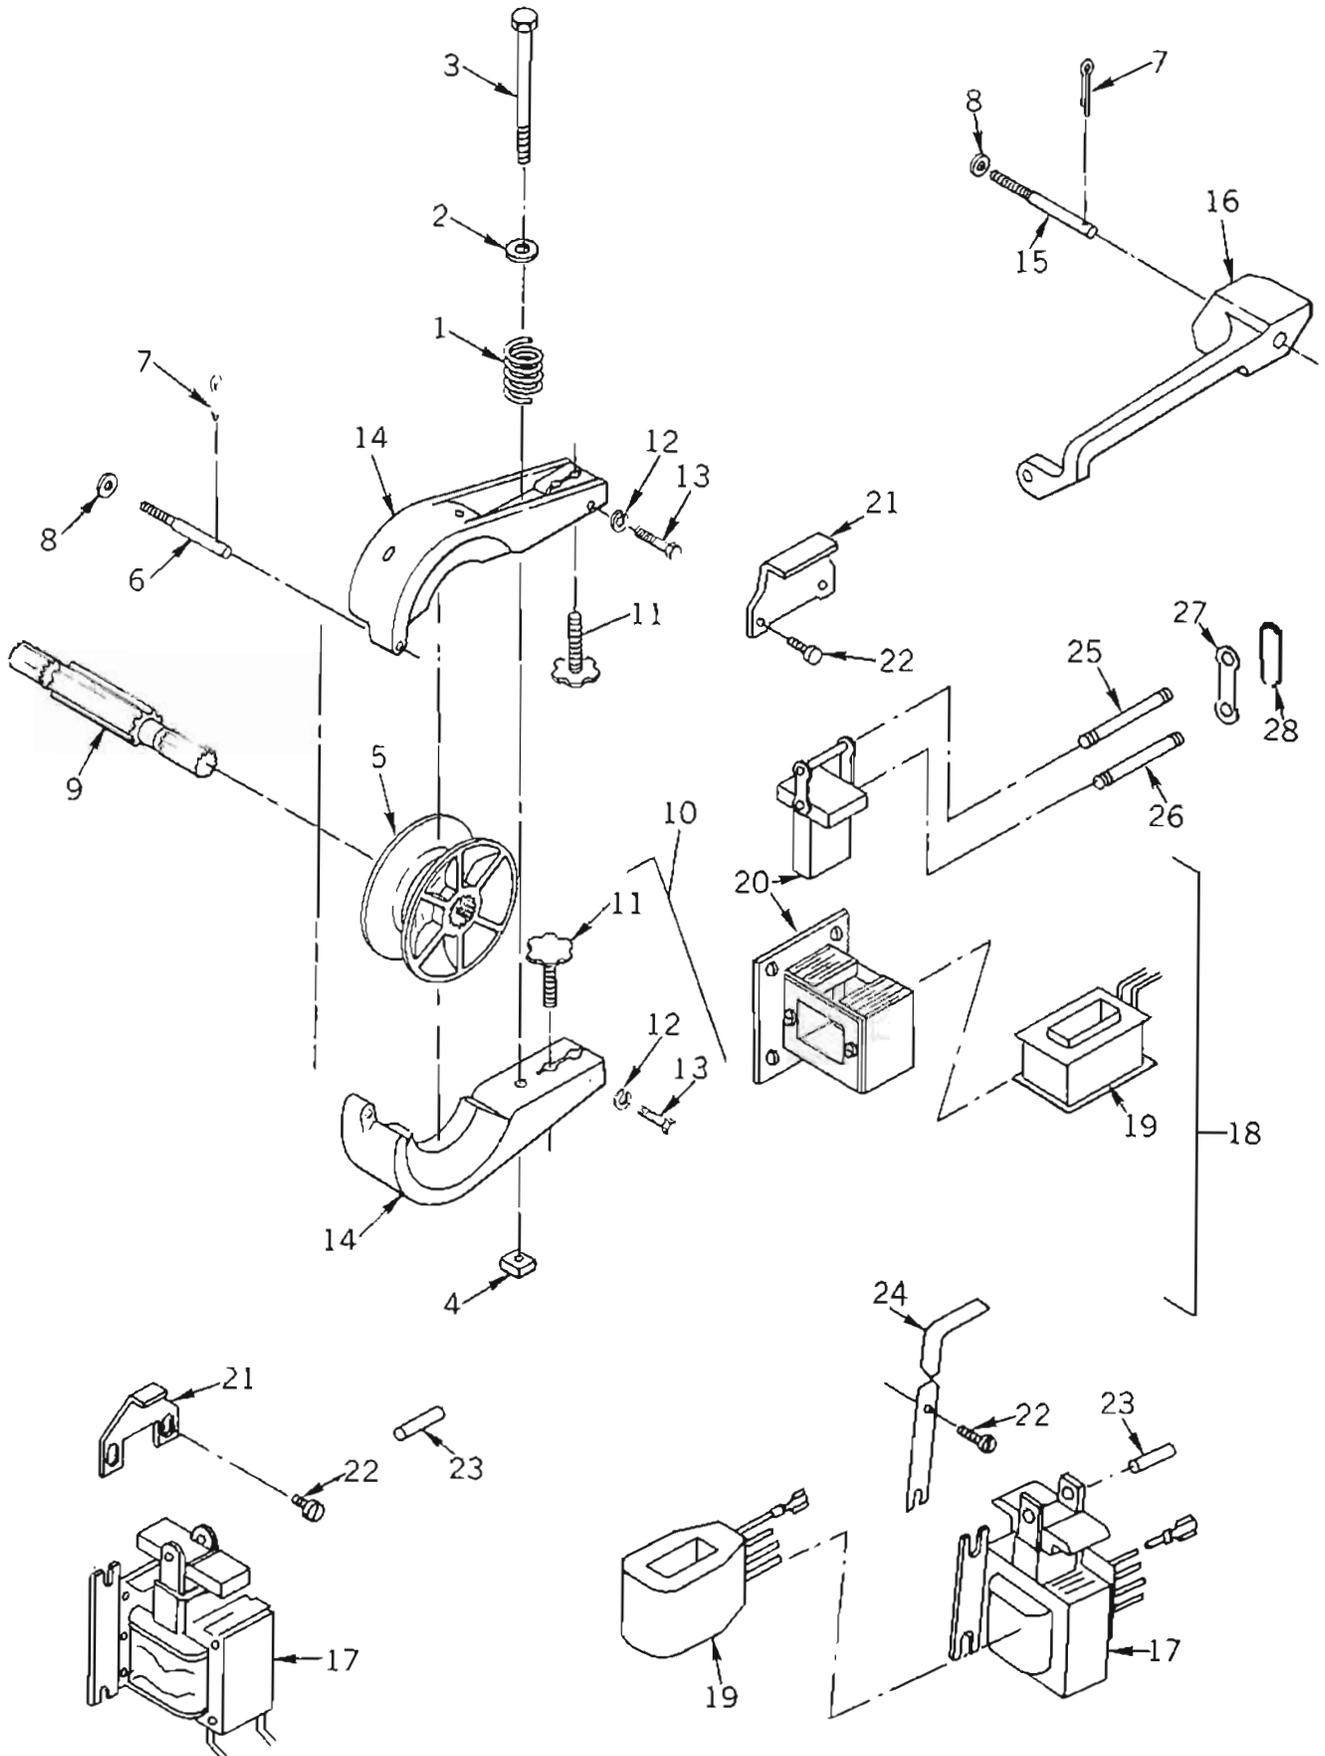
B. BRAKE AND SOLENOID PARTS
